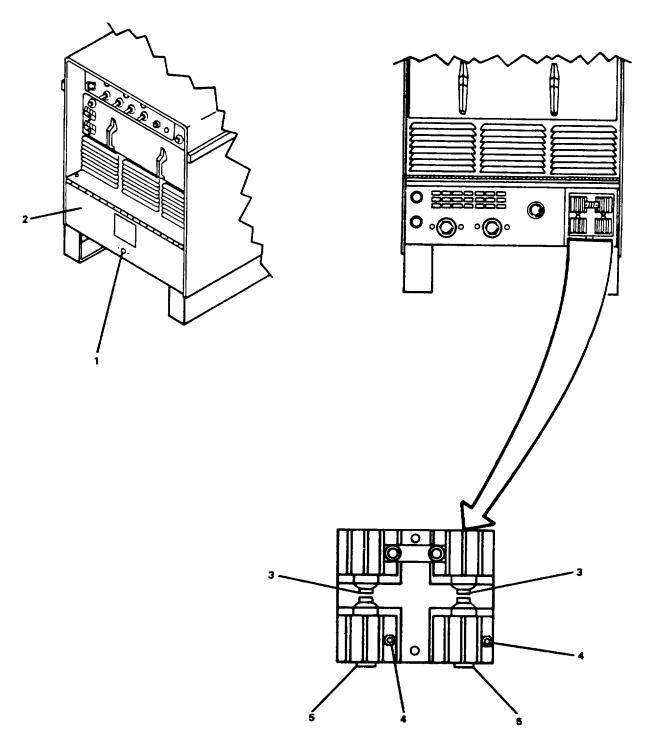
Arc Welding Machine Spark Gap Adjustment.
